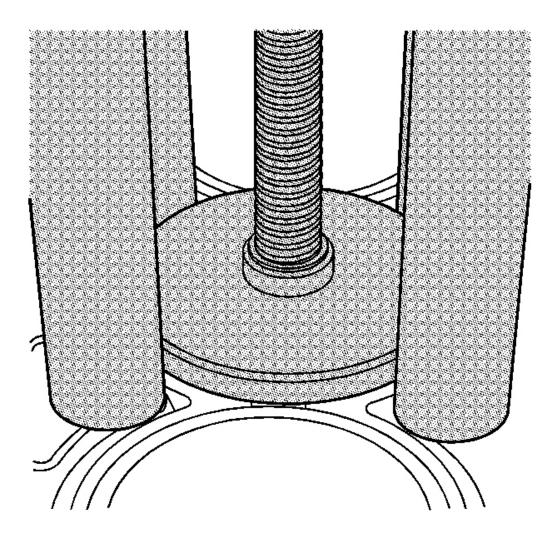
Seating Cylinder Bore Sleeve Completely Using Tool Courtesy of GENERAL MOTORS CORP.
